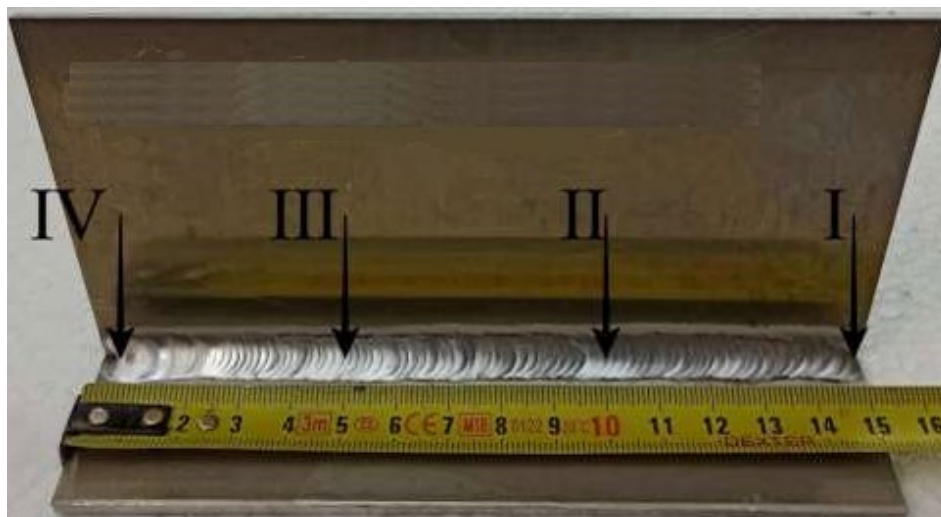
Examples of places where weld dimensions (thickness and width) [239, 240, 241] can be read
